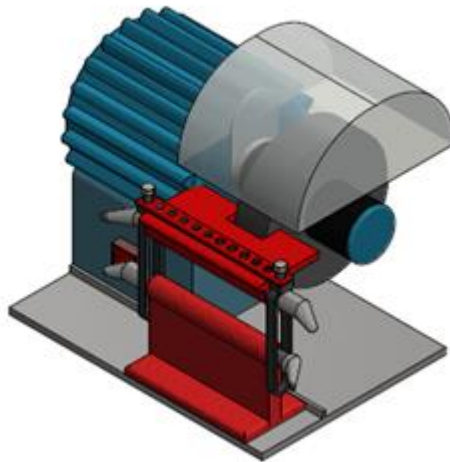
The Bevel Tool Preparation Machine Isometric Drawing
